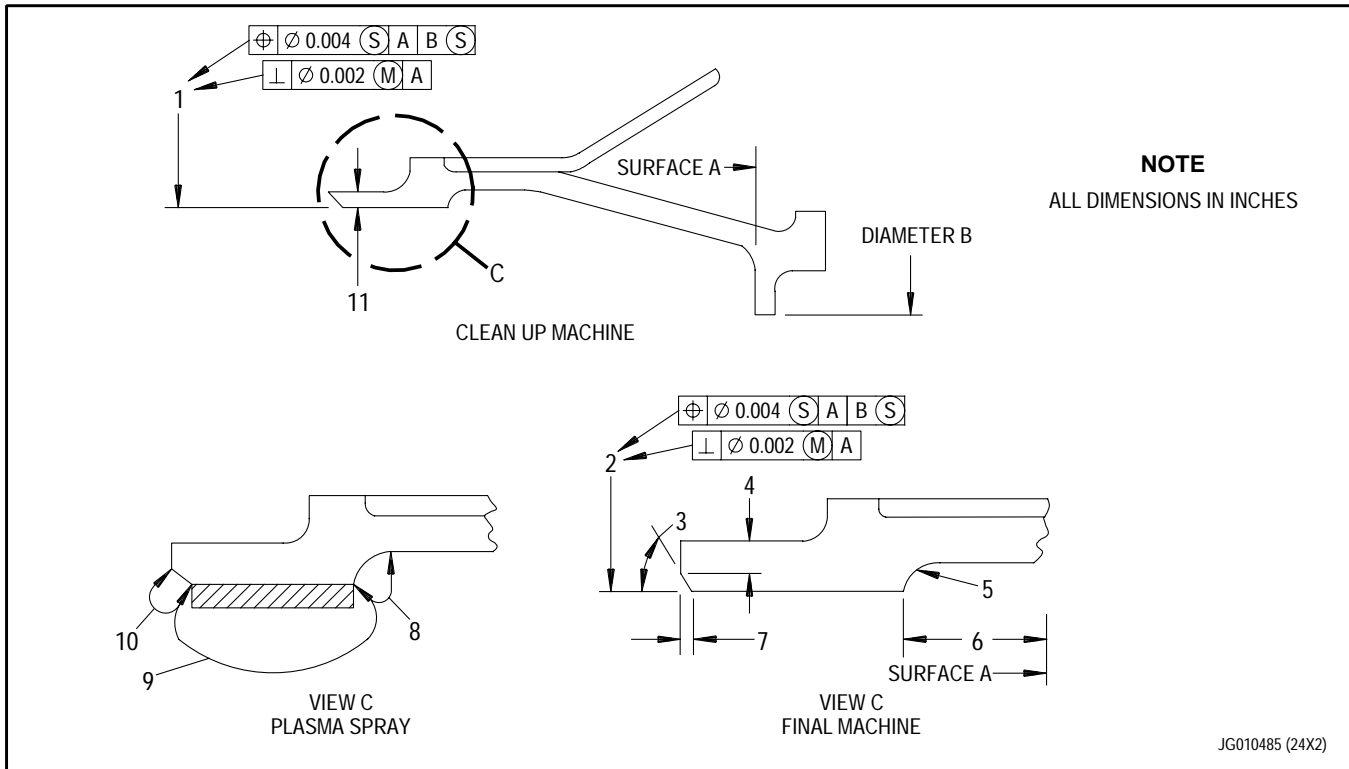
No. 4 Bearing Rear Air Sealing Ring Assembly - Plasma Spray Repair
